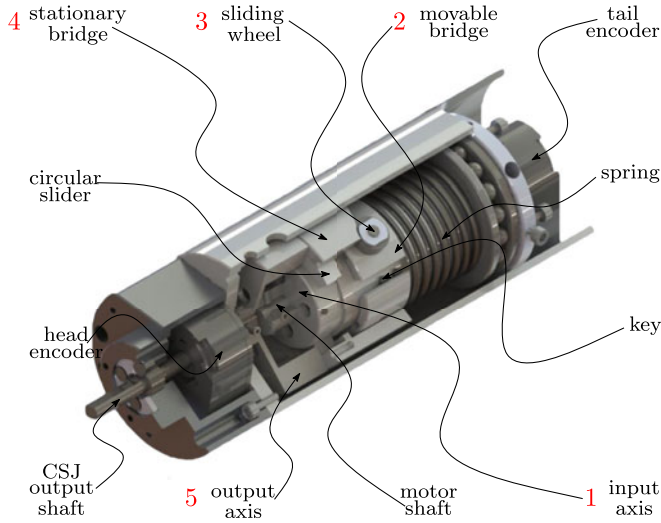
Part sectioned view of the CSJ's assembly showing the torque transmission chain.
